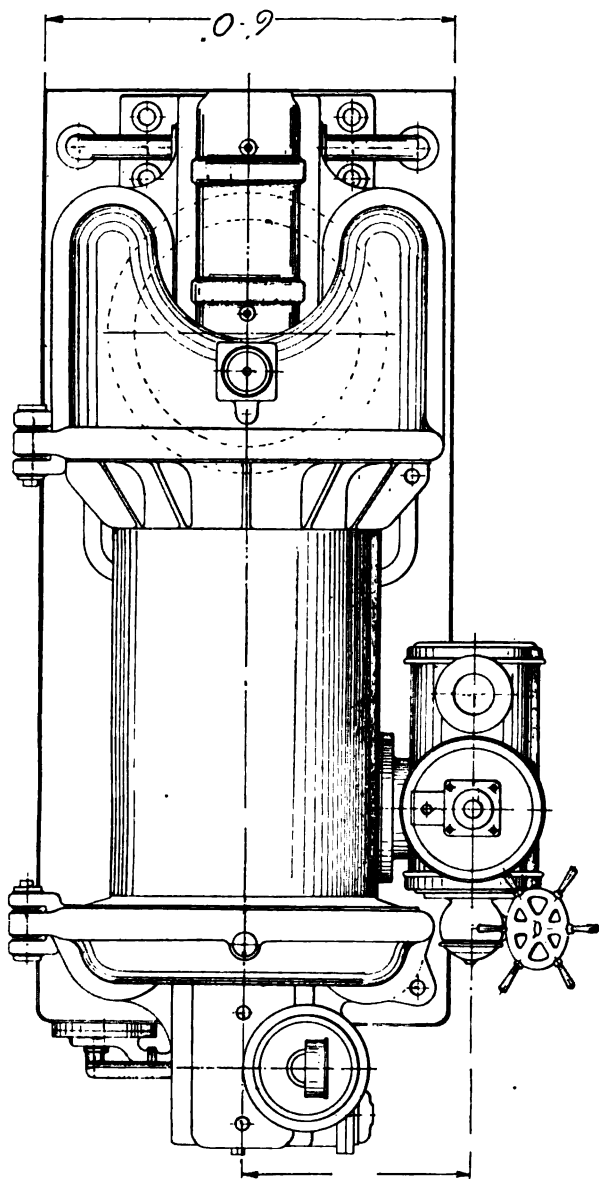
1000 K.W. Turbine. Brush Electrical Engineering Co., Ltd.
